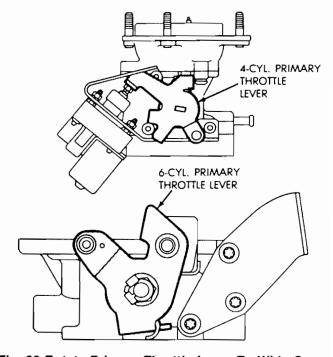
Rotate Primary Throttle Lever To Wide Open Position
